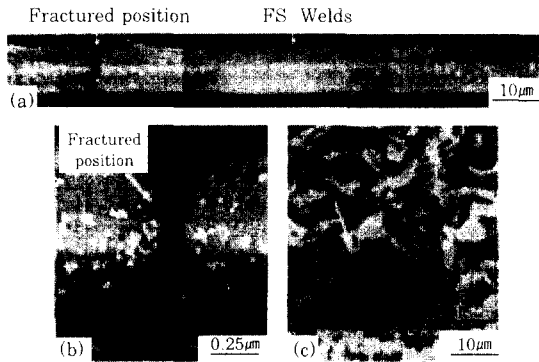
Macrostructure of cross section of FS Welds after transverse tensile test and fracture surface at base metal
